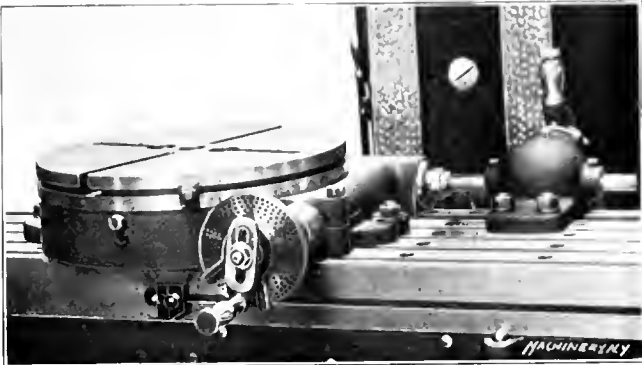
Circular Milling Attachment with Automatic Feed and Throw-out.
